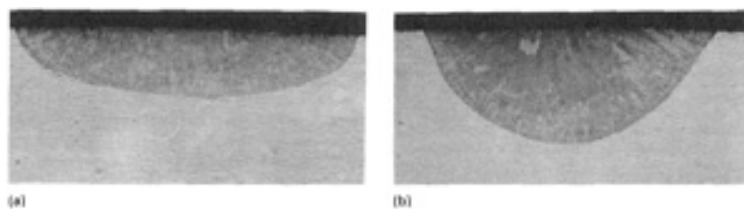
PARTIAL-PENETRATION GTA WELDS MADE UNDER THE SAME WELDING CONDITIONS ON TWO HEATS OF TYPE 304L STAINLESS STEEL HAVING THE SAME NOMINAL COMPOSITION. (A) 3 PPM S, $D/W = 0.2$. (B) 160 PPM S, $D/W = 0.40$. $9\times$
